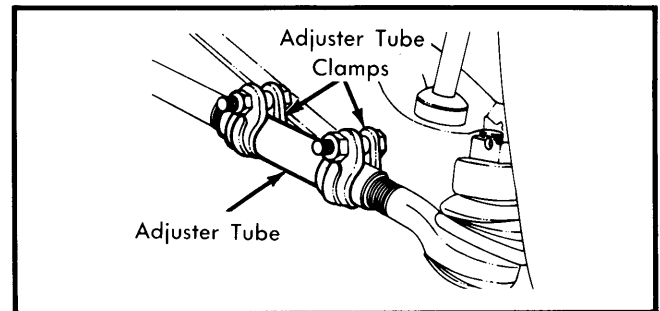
Toe-in Adjuster Tube Clamp & Bolt Position
